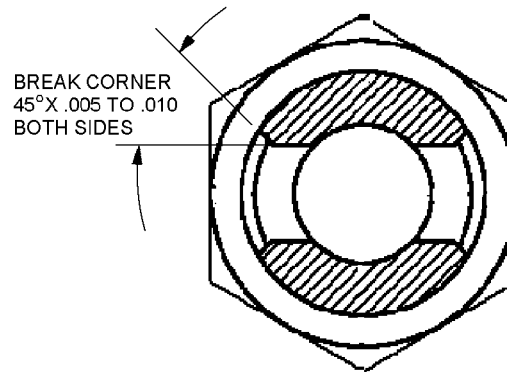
Bolt - fluid passage dimensions and configurations.
